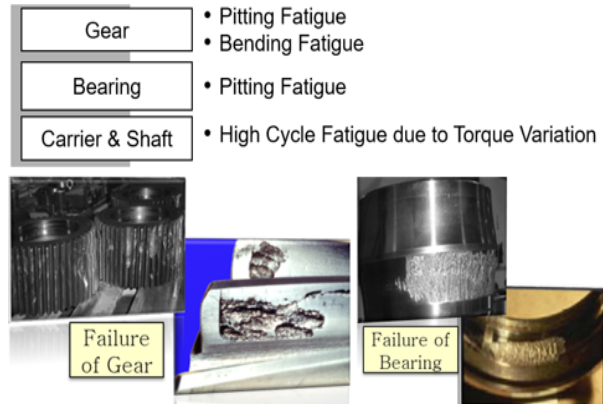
Failure mode of yaw gearbox⁴⁾
